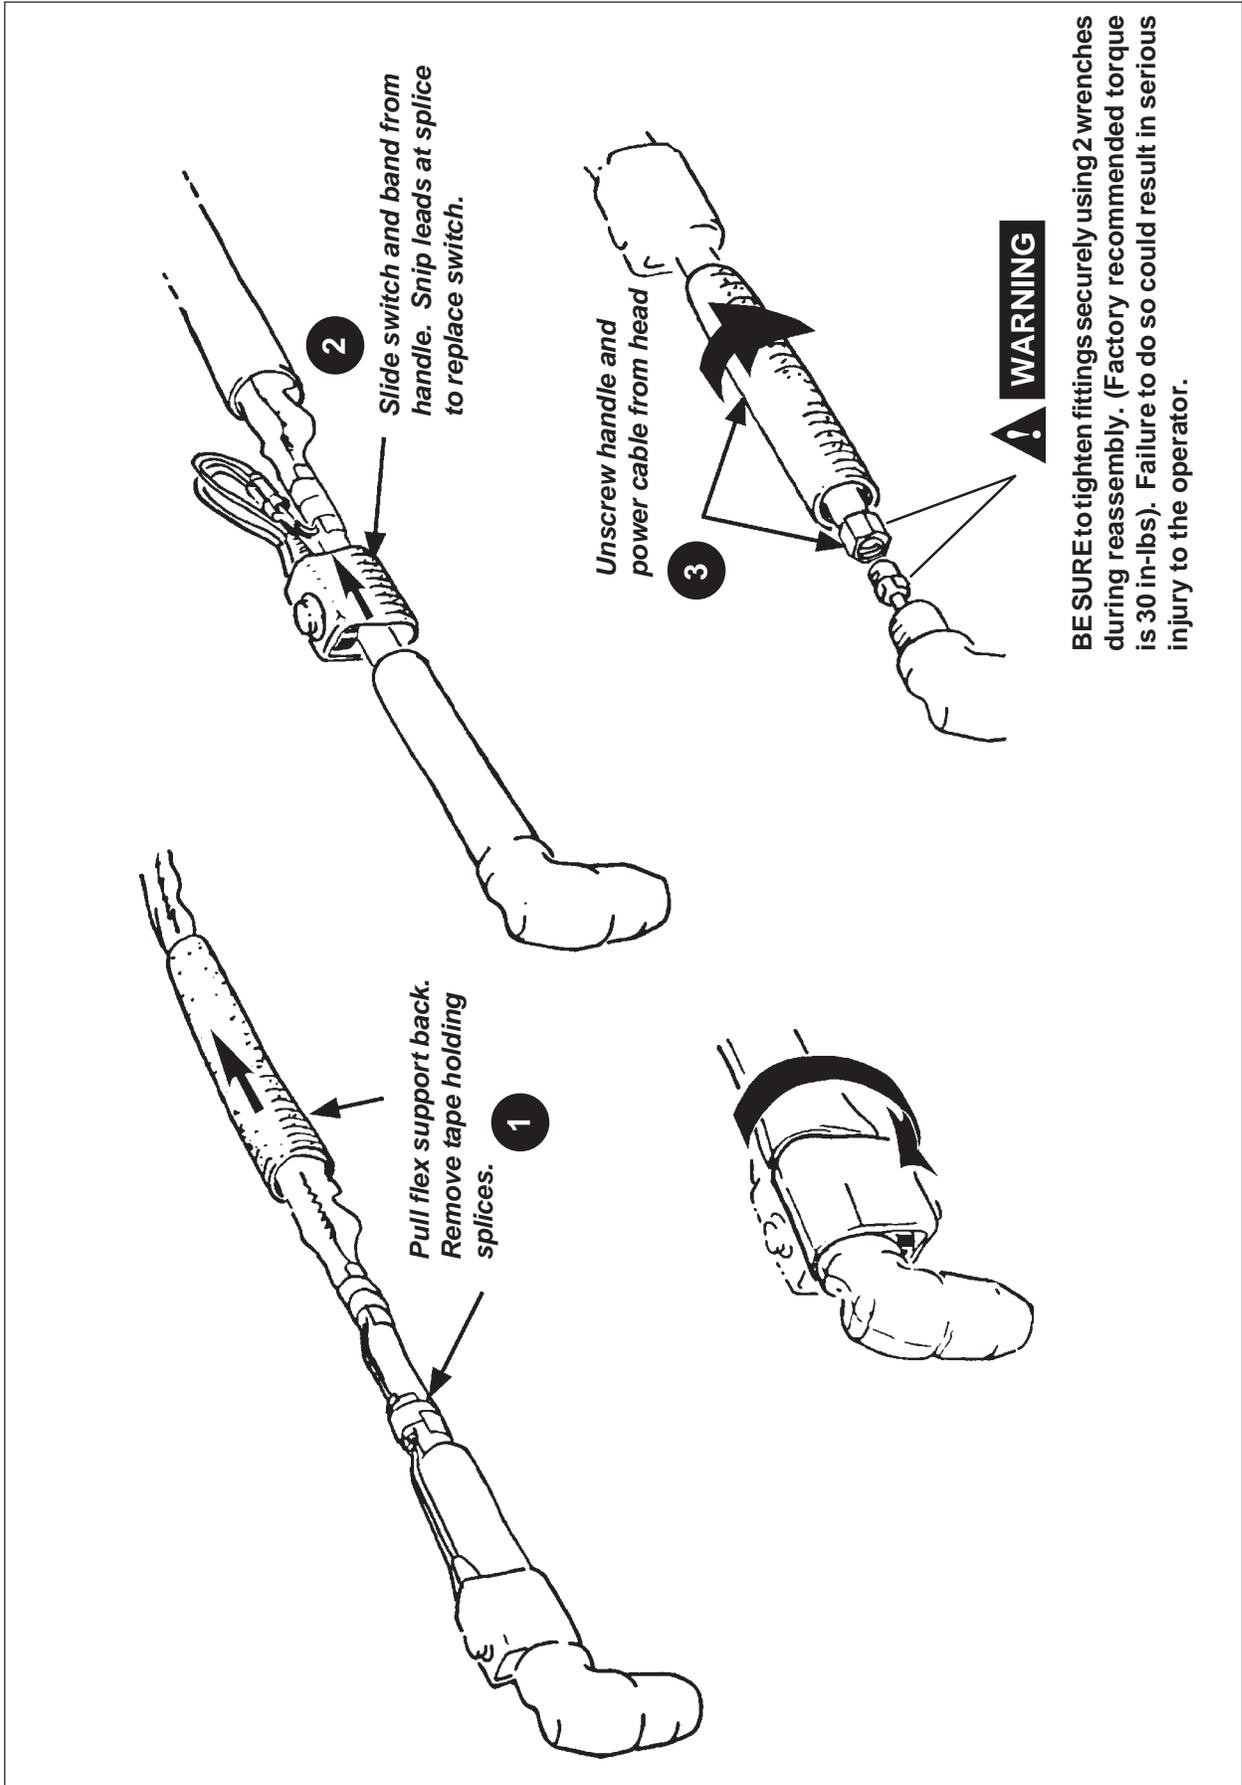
Power Cable and Switch Disassembly Sequence
